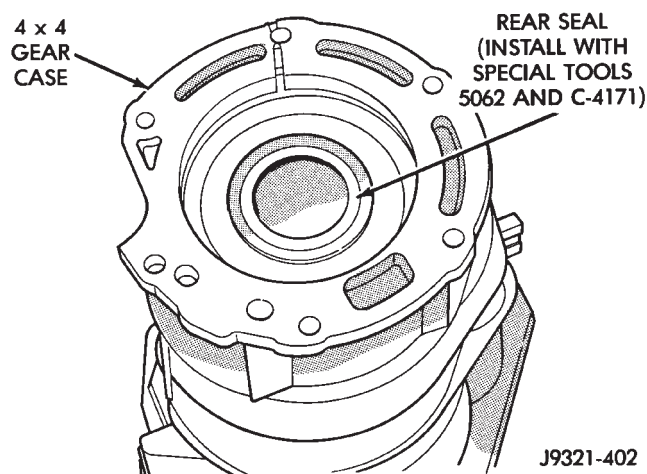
Rear Seal Installation (In 4 x 4 Gear Case)
